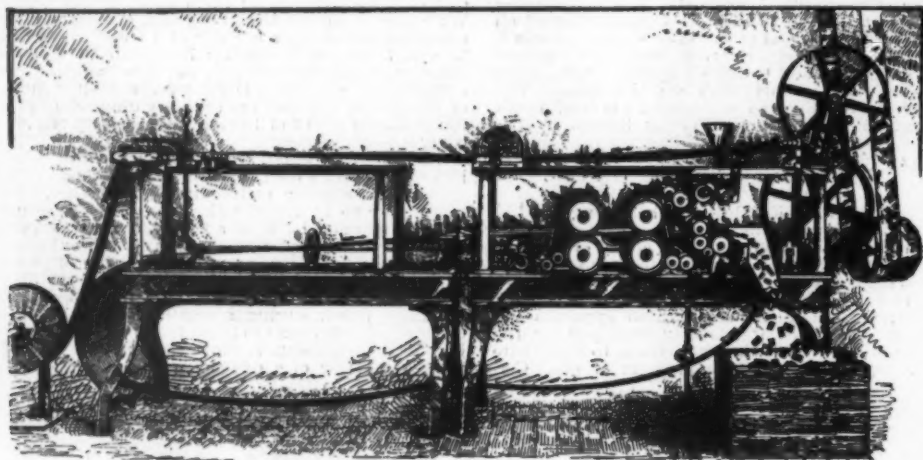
MACHINE FOR MAKING STRAWBOARD BOX COVERS.
